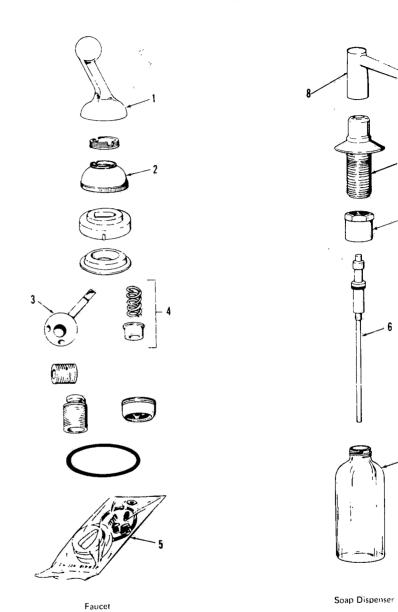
FAUCET AND SOAP DISPENSER ASSEMBLY.
